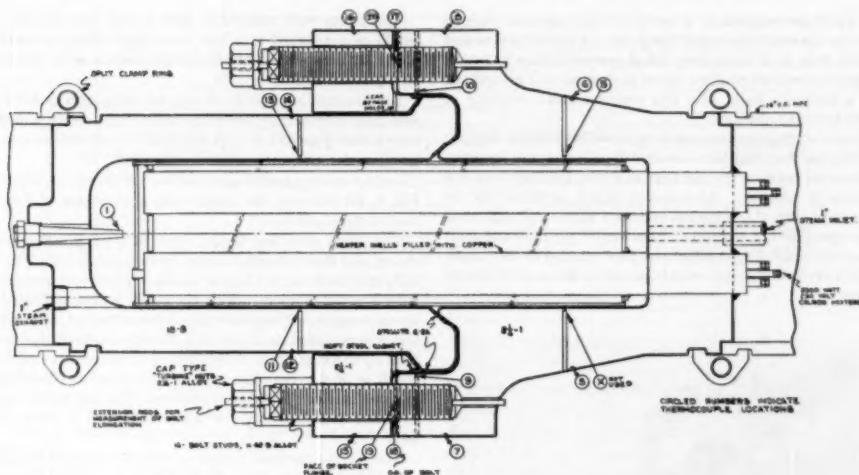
SECTIONAL VIEW OF PRESSURE-SEAL JOINT AS ASSEMBLED FOR TEST
